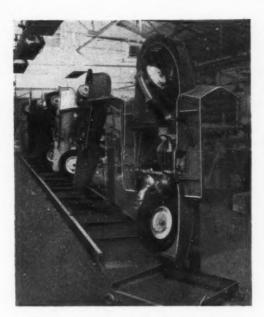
A View of the Assembly Line, Showing the Track and Special Fixtures for Supporting the Scooters
